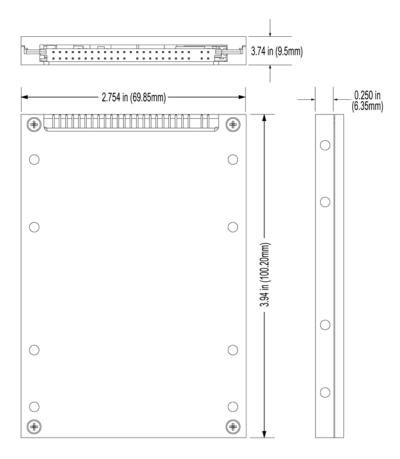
Zeus 2.5-inch ATA SDD Exterior Dimensions
